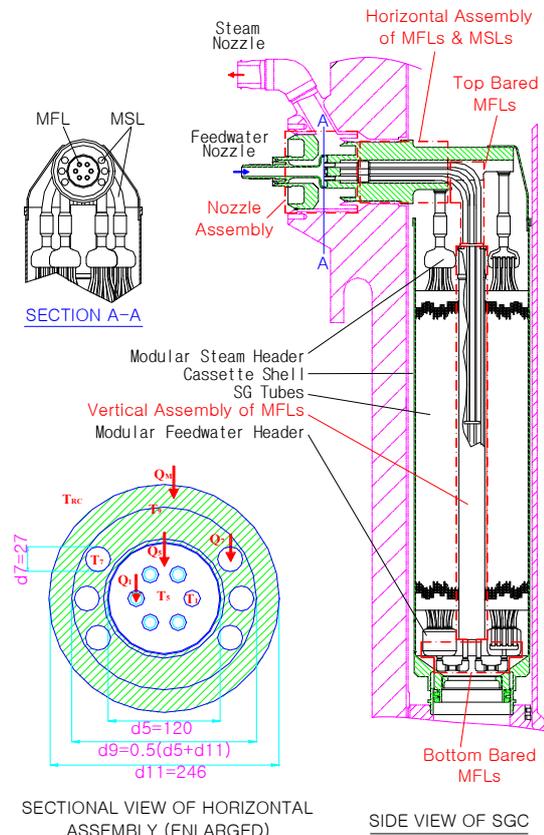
The SGC with a Sectional View of the Horizontal Assembly of the MFLs and MSLs
